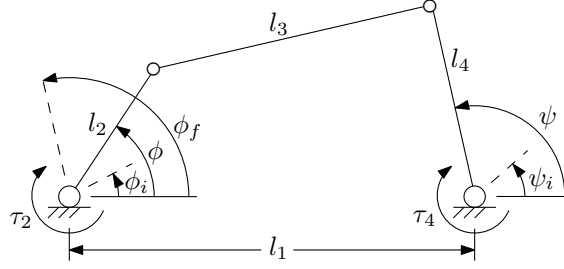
Design parameters of the four-bar mechanism with constant-torque springs.
